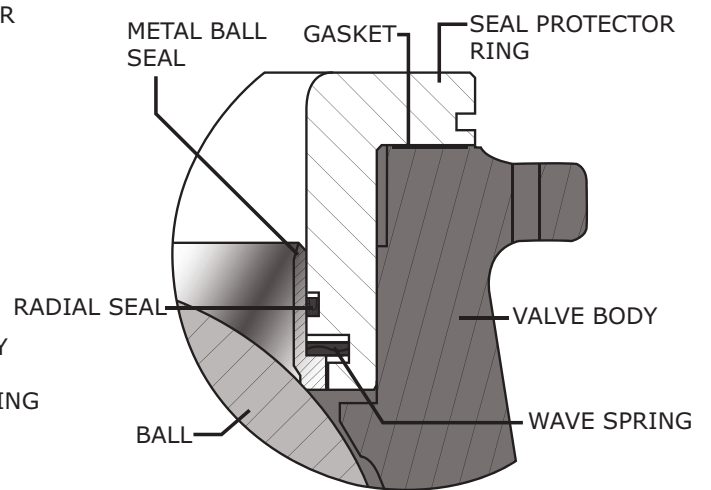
Ball Seal Assembly Diagrams - Composition Ball Seal 1 to 12 Inch Valves (Continued in Figure 10)
